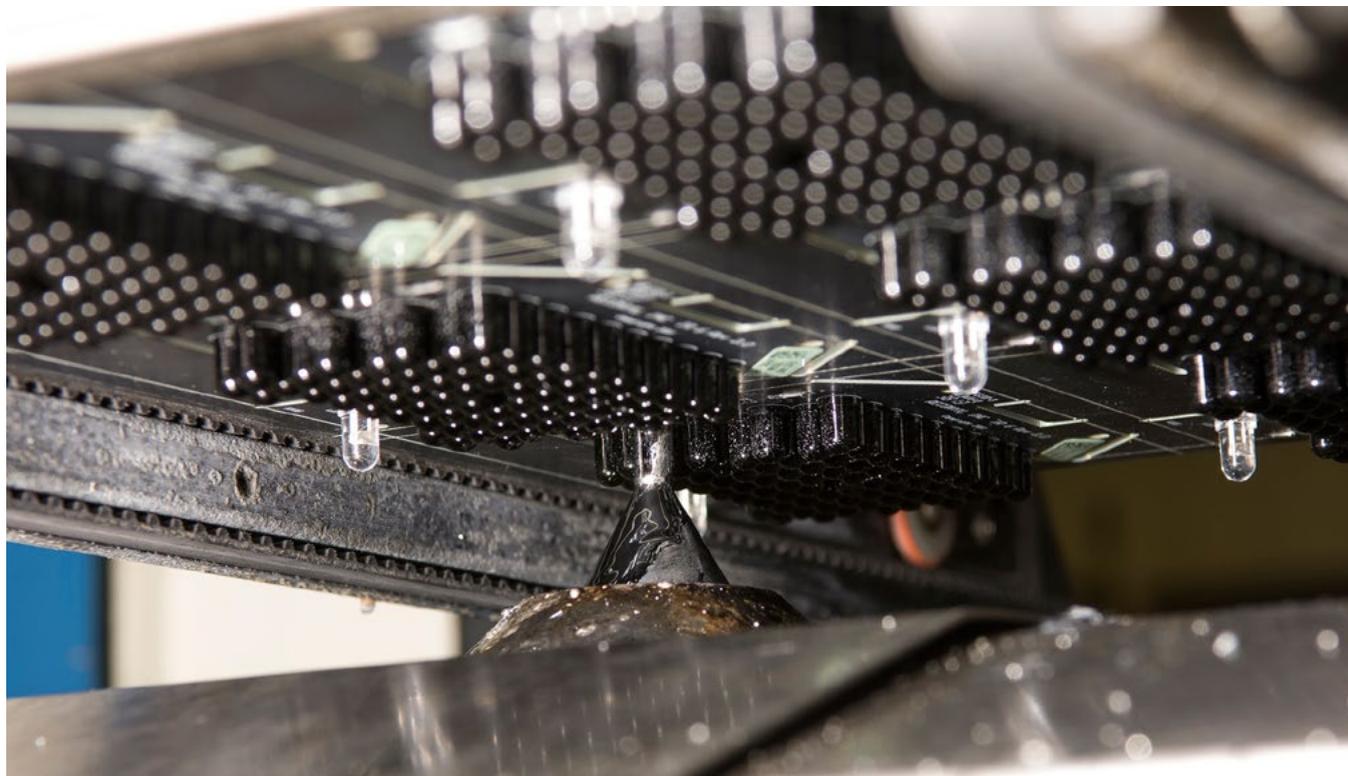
An automated selective solder process is used on mixed technology PCBAs with minimal through-hole components.
